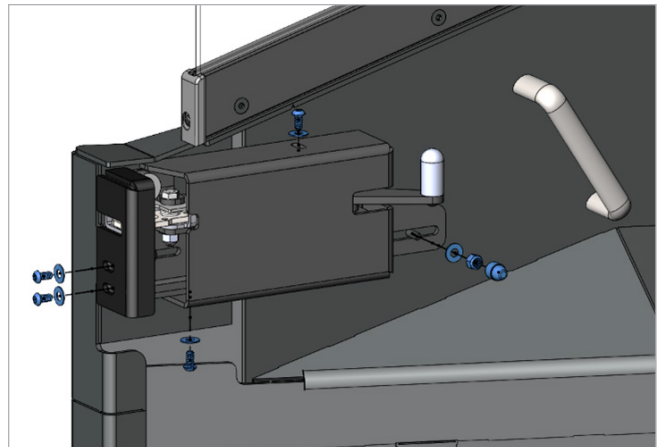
Nut cover, nut, washer, and button head screw locations.
